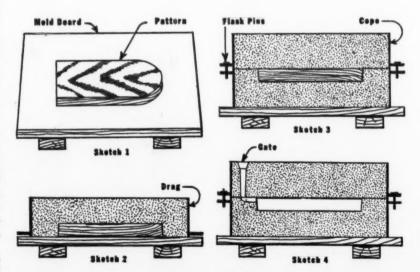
Pattern is used to form cavity in mold for molten metal.
